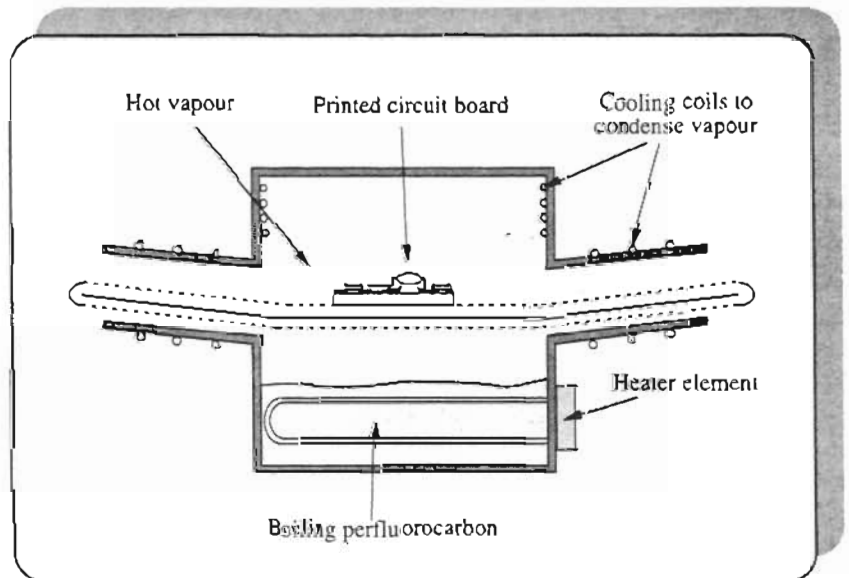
Principle of a hot vapour soldering process, in which assemblies are soldered in a liquid in its saturated vapour phase
